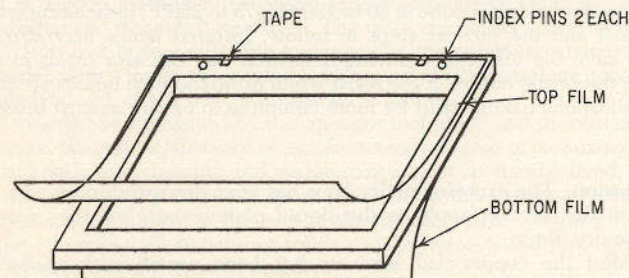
Photoresist exposure jig for double-sided printing.
